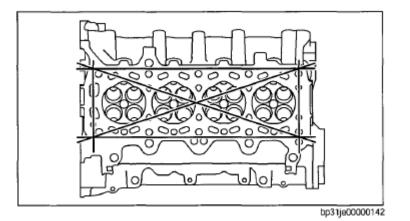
Measuring Combustion Chamber Side Of Cylinder Head For Distortion Using Straight Edge And Feeler Gauge
